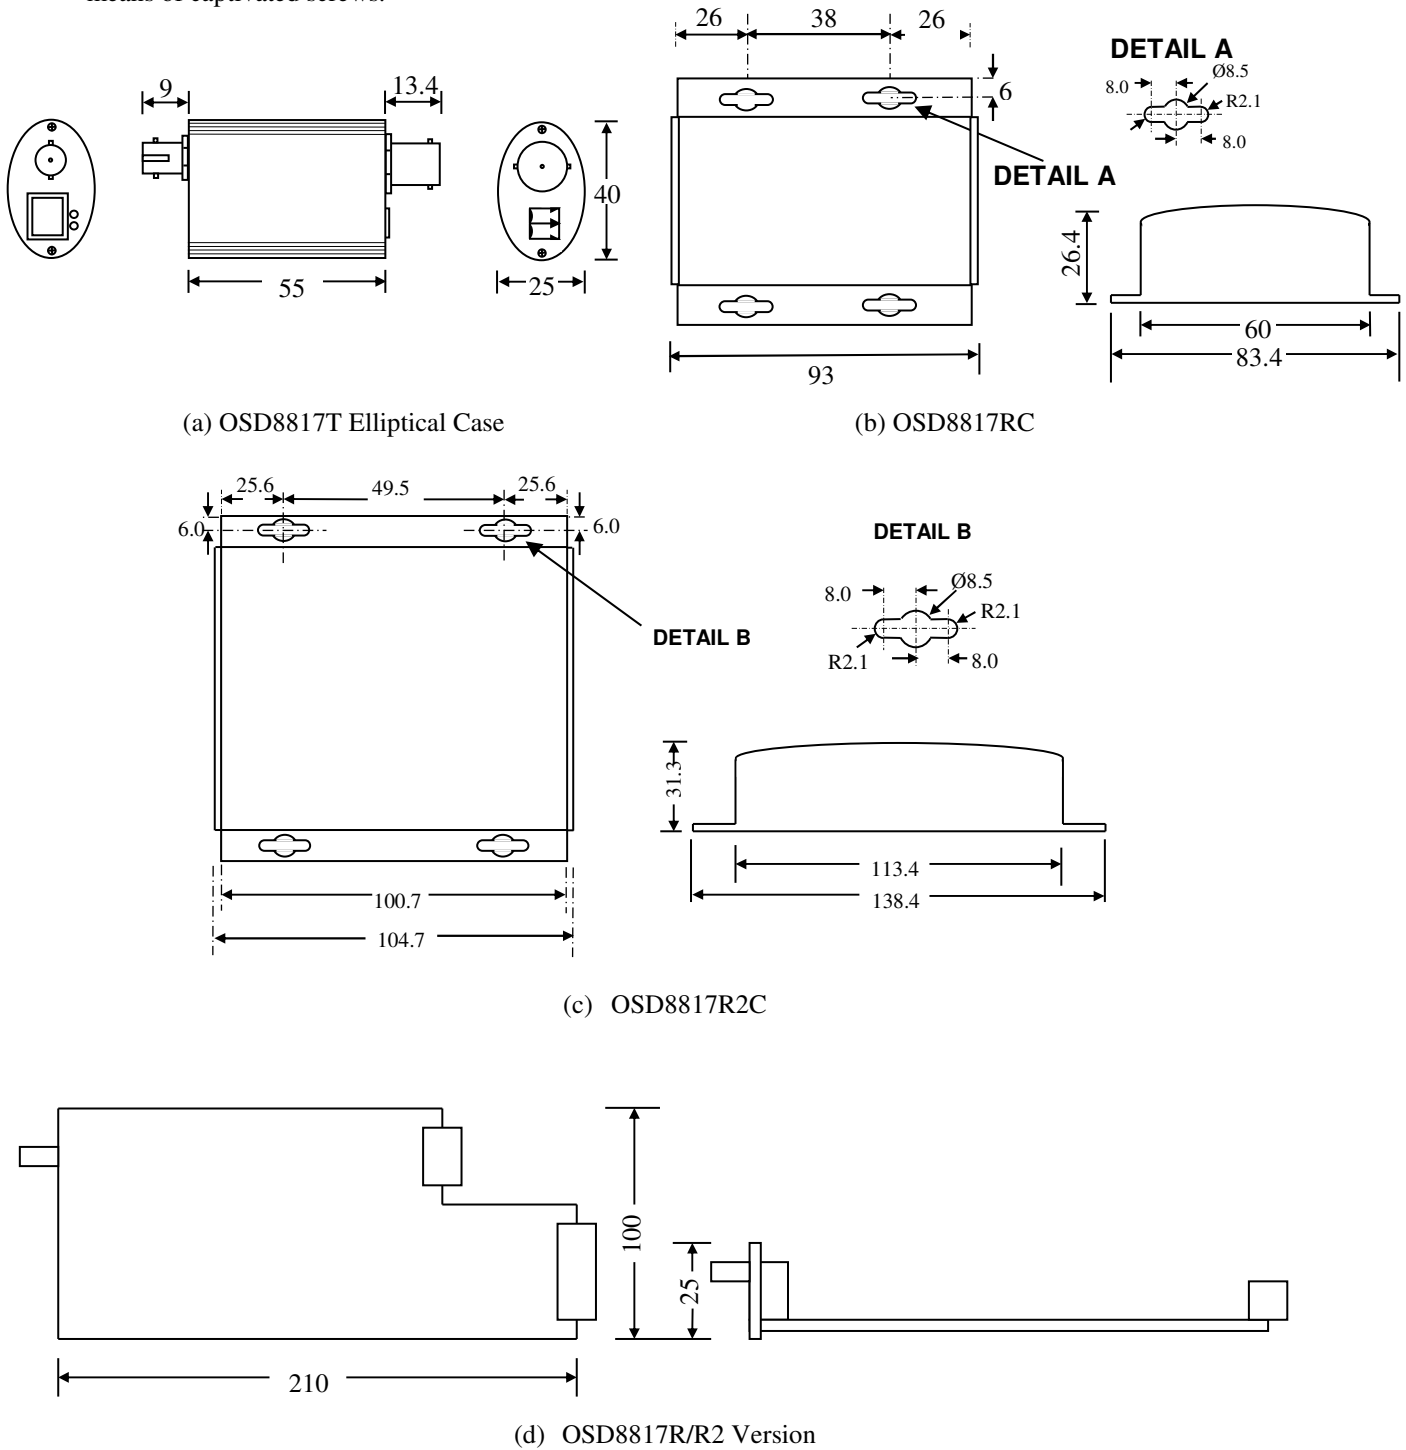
OSD8817 MOUNTING DIMENSIONS
